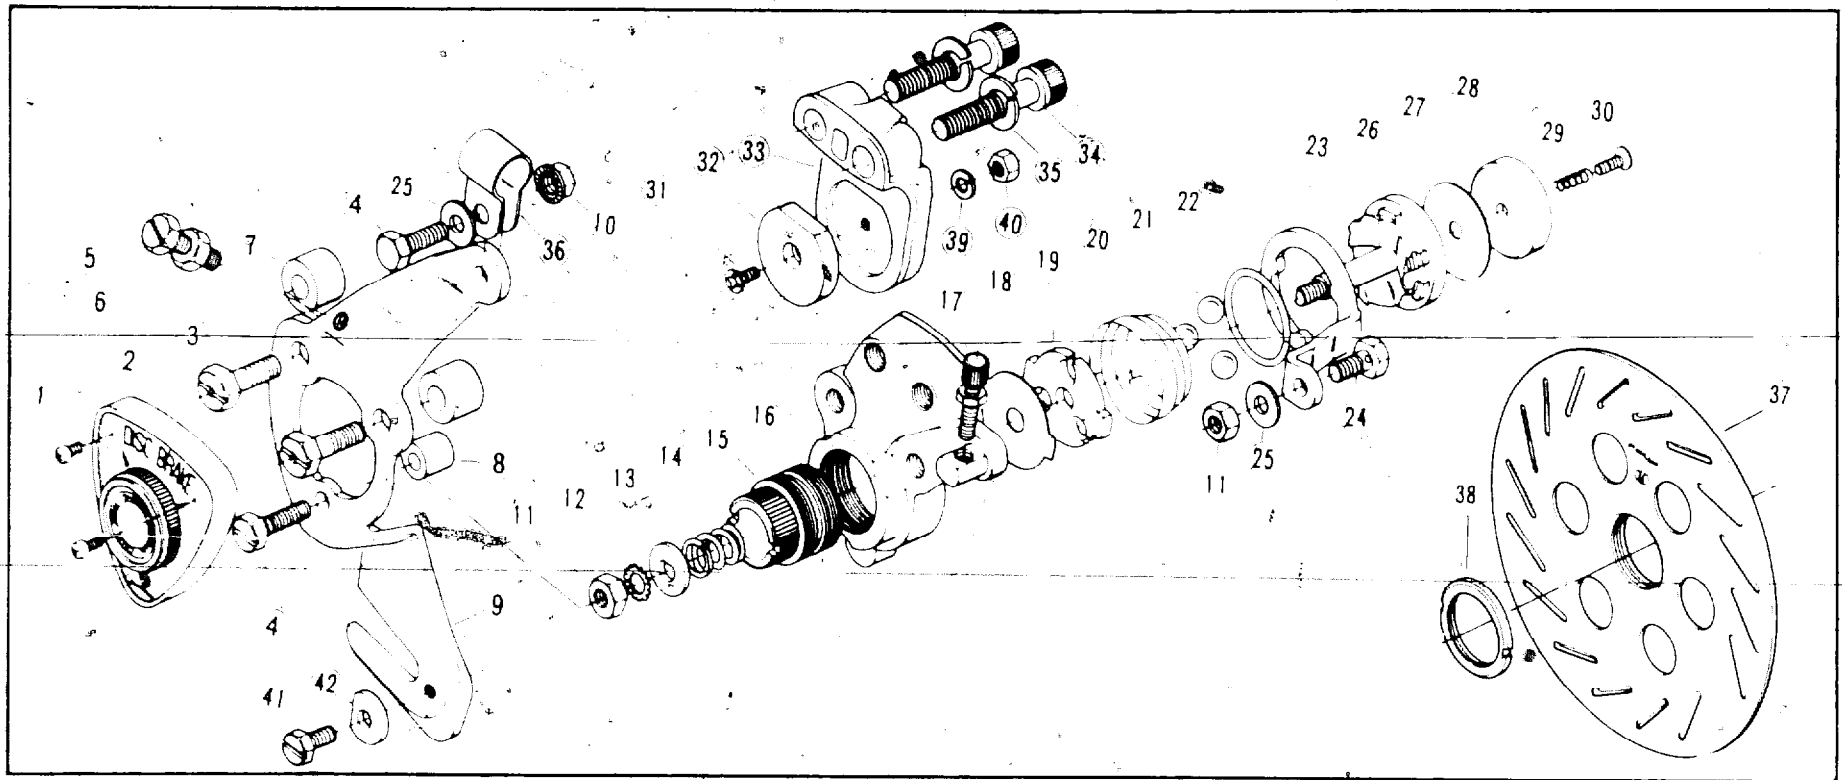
Exploded view of Shimano Model BC-100 disc brake. Parts are: (1) cover fixing bolt, (2) bracket cover, (3) adjusting bolt A, (4) adjusting bolt B, (5) setting bolt, (6) setting nut, (7) adjusting rubber A, (8) adjusting rubber B, (9) bracket, (10) flange nut, (11) nut, (12) toothed lock washer, (13) non-turning washer, (14) return spring, (15) adjuster, (16) holder A, (17) cable adjusting bolt and nut, (18) ball plate, (19) ball retaining plate, (20) dust cover, (21) steel ball, (22) stop ring, (23) brake arm, (24) cable fixing bolt, (25) cable fixing washer, (26) cam plate with center pin, (27) thrust washer, (28) pad B, (29) non-turn spring, (30) countersunk screw A, (31) countersunk screw B, (32) pad A, (33) holder B, (34) through bolt, (35) spring washer, (36) clip band, (37) disc plate, (38) lock ring, (39) spring washer, (40) pad lock nut, (41) bracket fixing bolt and (42) bracket fixing washer.
